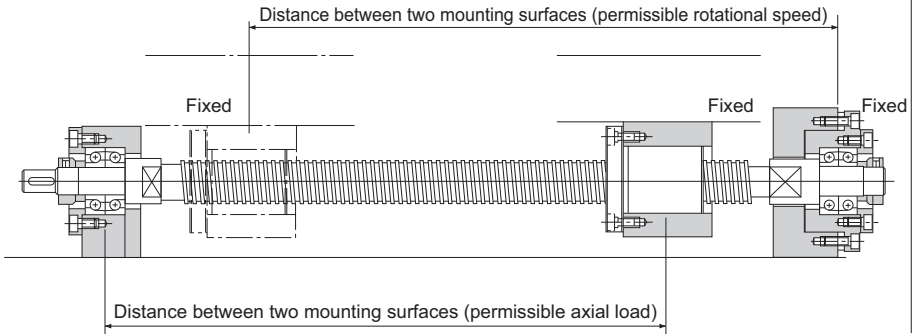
Screw Shaft Mounting Method: Fixed - Fixed
